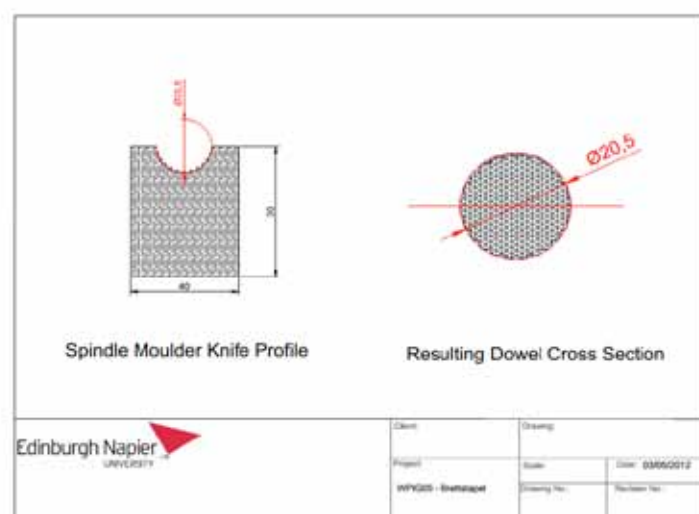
CAD drawing of 20.5mm diameter cutter profile for ribbed dowels (drawn by J. Hawker)
